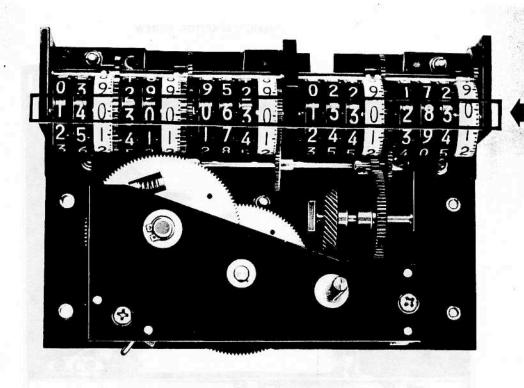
Tuning Drive Subassembly, Control Dial Alignment
